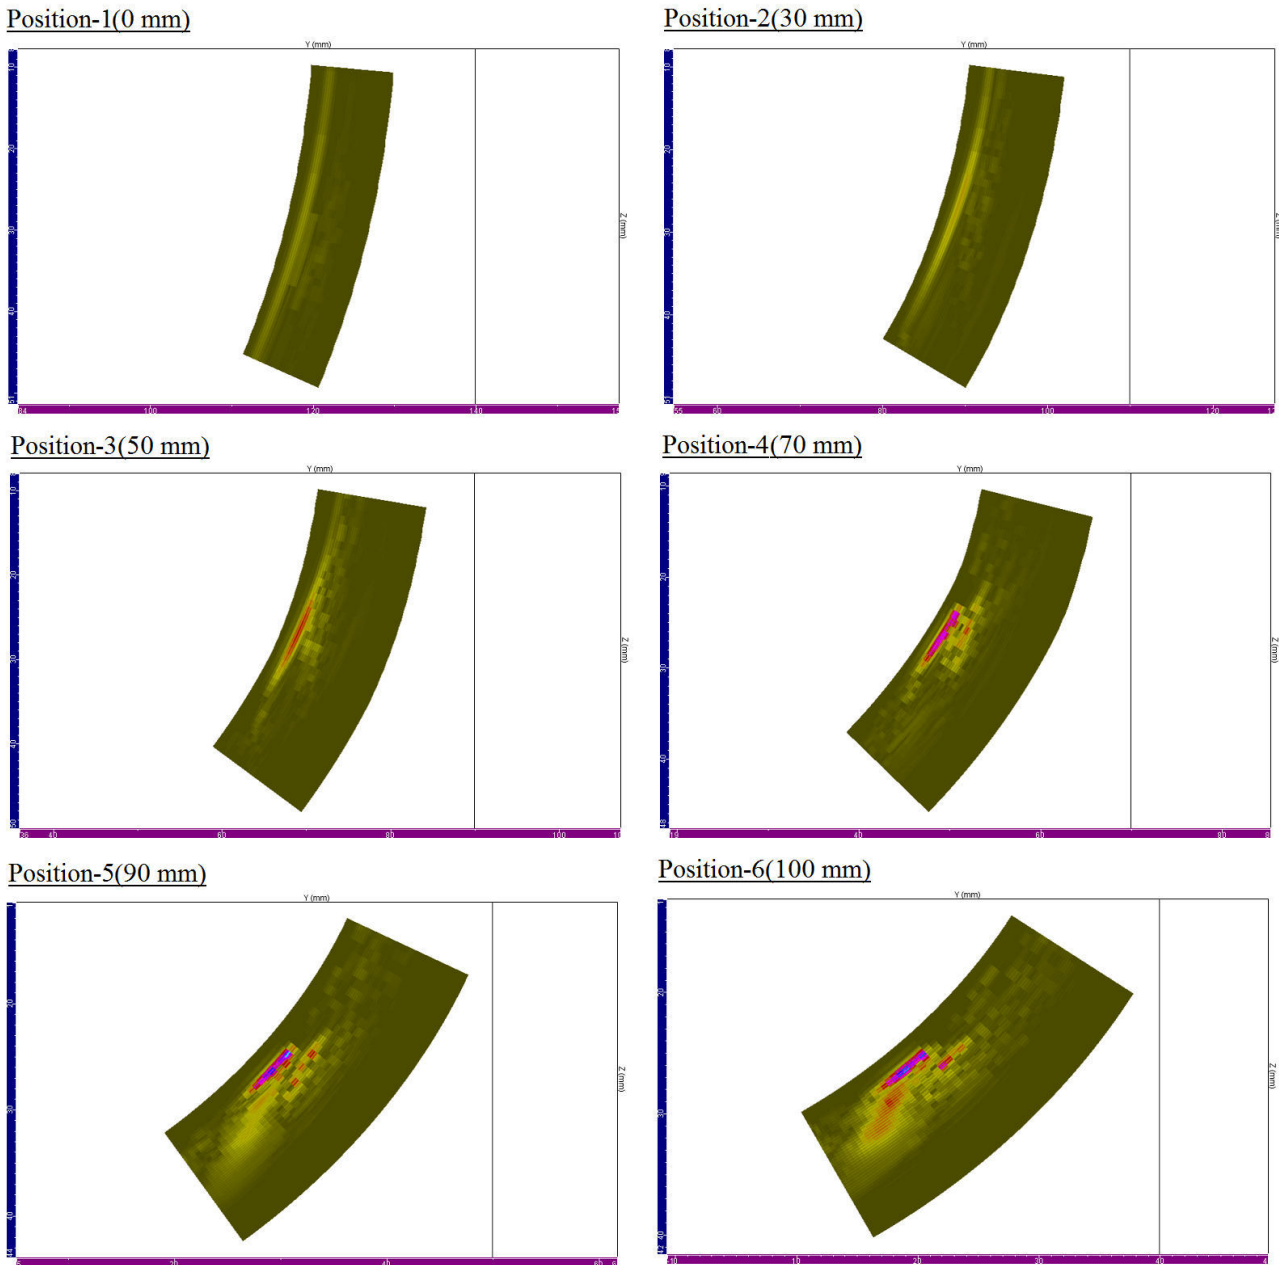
Calibrated S-scan results at each wedge position when inspecting defect-1
